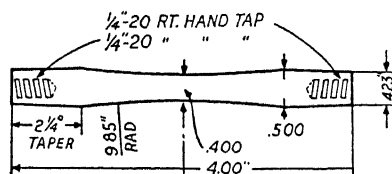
Specimen for fatigue test of weld metal.
